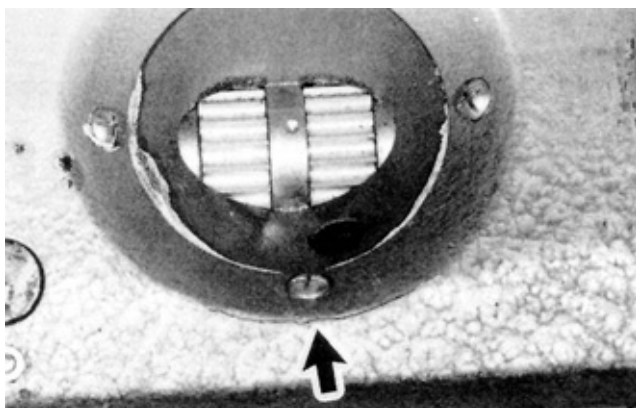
Fatigue Cracks in Hopper Bottom.
